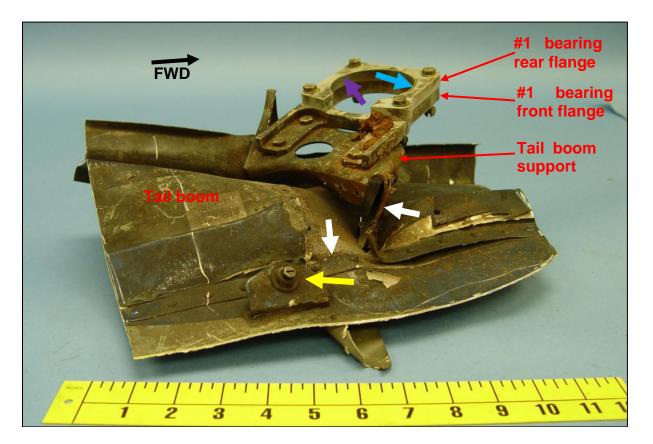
The #1 bearing flange assembly and tail boom piece removed from the location indicated by the blue arrows in Figure 44.
